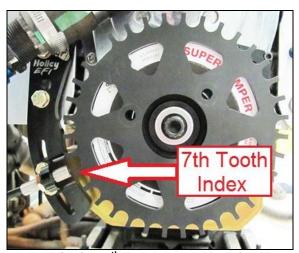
Aligning 7th Tooth Index Mark for Mounting
